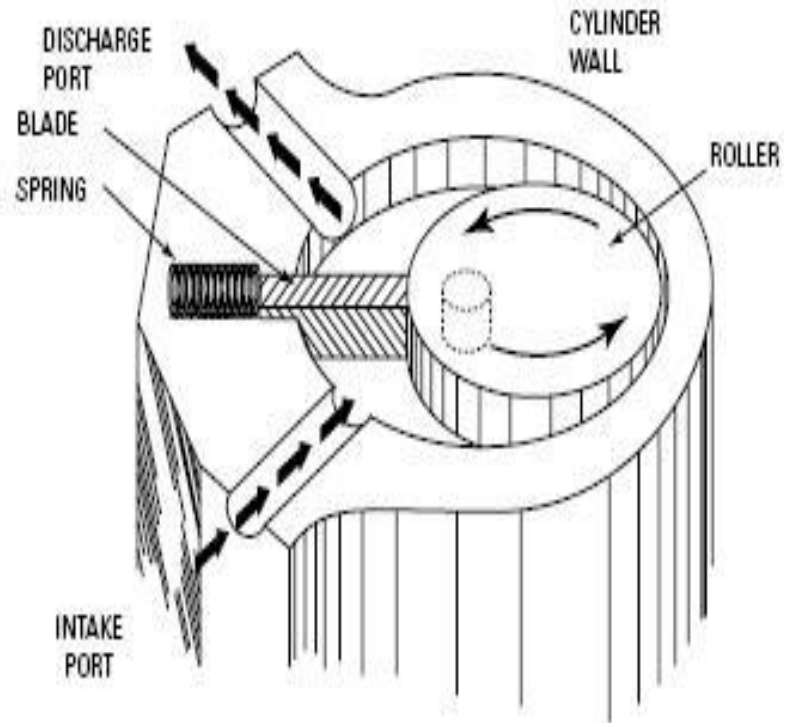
Parts labeled for a stationary blade rotary compressor.
